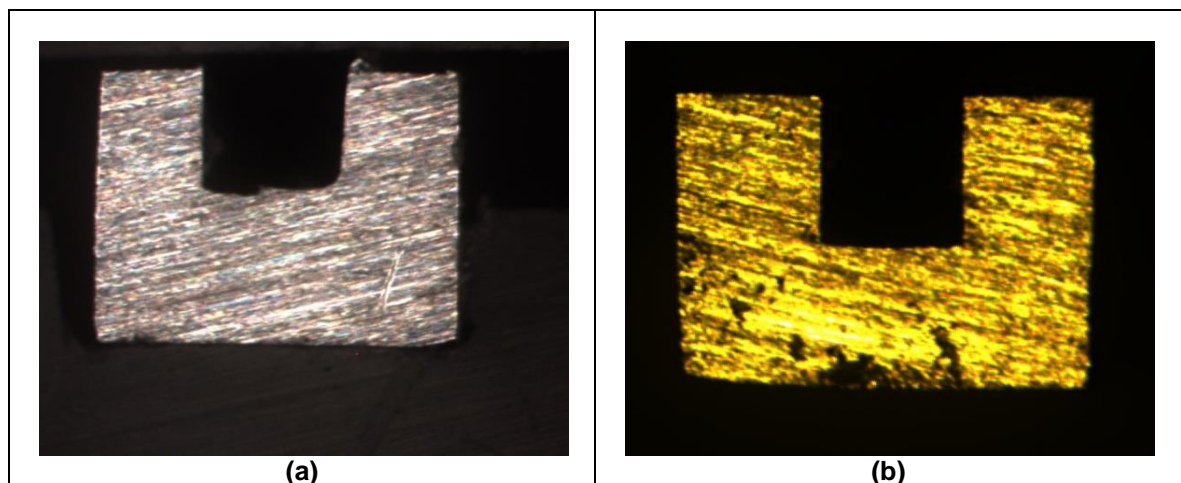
Stainless steel microchannel (a) machined using a sawing process, (b) machined using a drawing process
